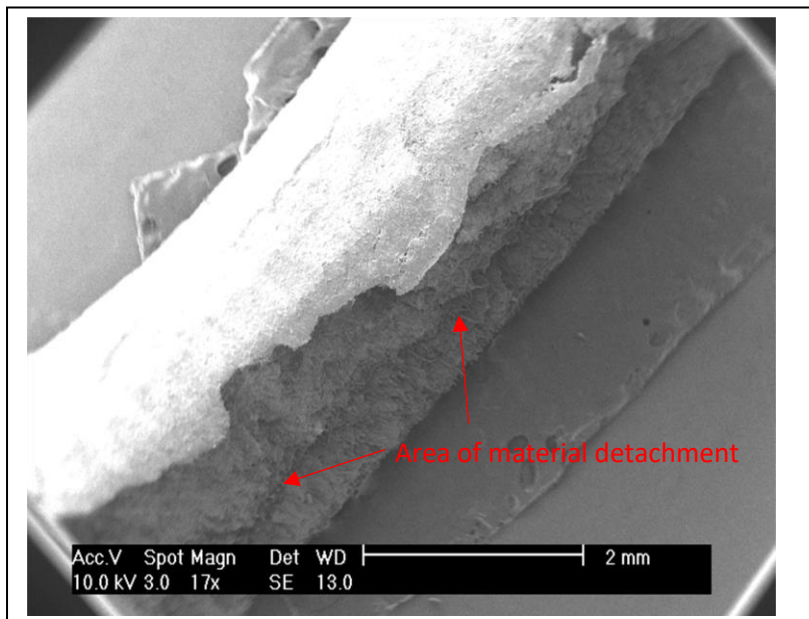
65°C broken tooth showing little flaring at point of detachment.
